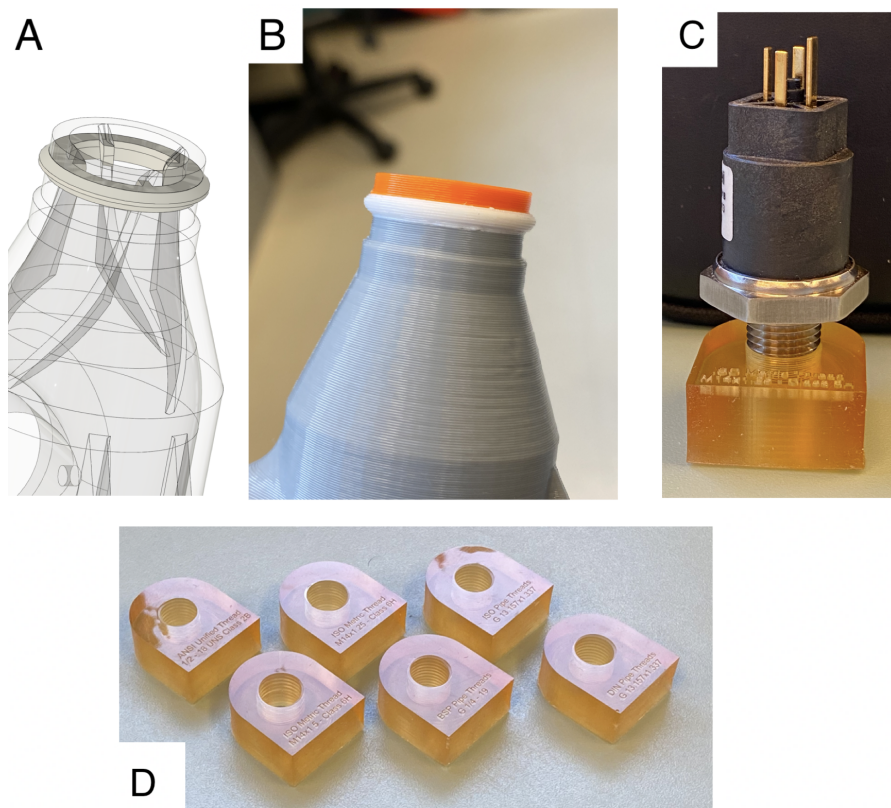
Integrated TPU gaskets, thread fitting and optimization. a) CAD design of the multi-material integrated flexible TPU gasket shown in white. b) FDM print using grey PETG, white TPU, and orange PETG. c) Correctly fitted pressure sensor hermetically threaded into material. d) 6 Different standard threads printed in PEGDA resin.
